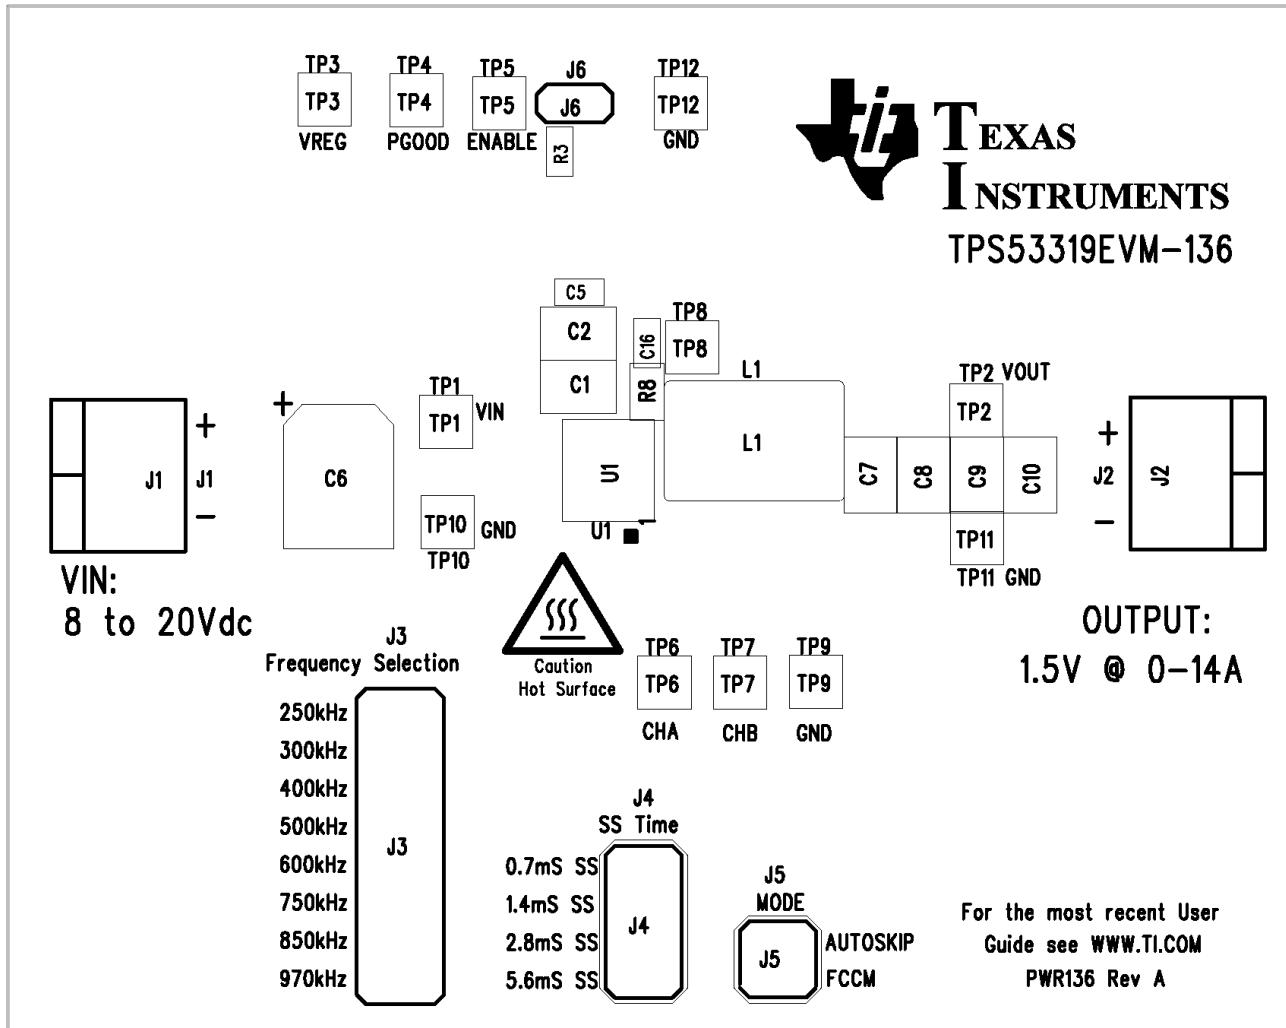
TPS53319EVM-136 Top Layer Assembly Drawing
